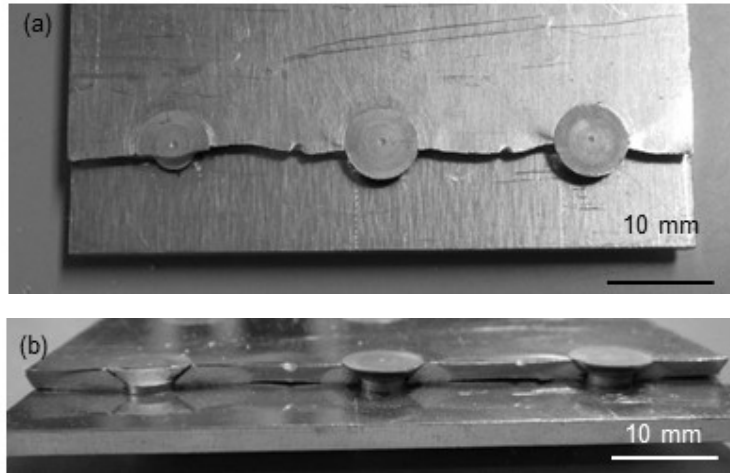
Riveted joint fractured on manufacturing side ( $\Delta\sigma = 100.0$  MPa, failed at 143k cycles) (a) top view and (b) fracture surface
